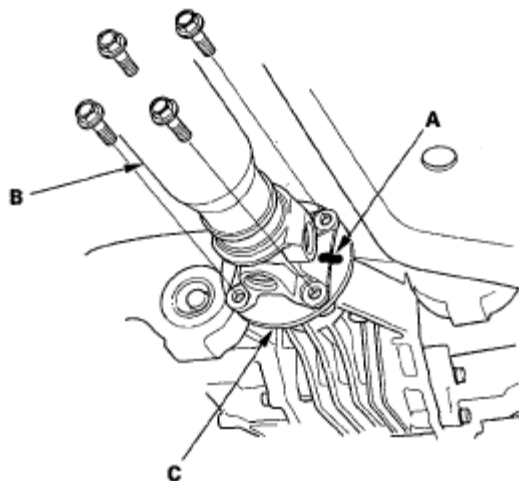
Identifying Reference Marks On Propeller Shaft And Rear Differential Companion Flange
